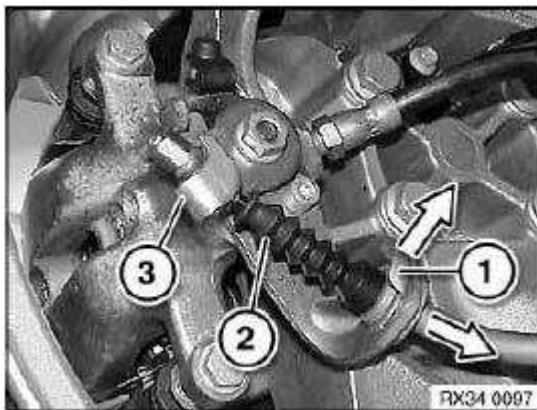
Locking Clip, Bowden Cable, Actuating Lever And Removal Directions
